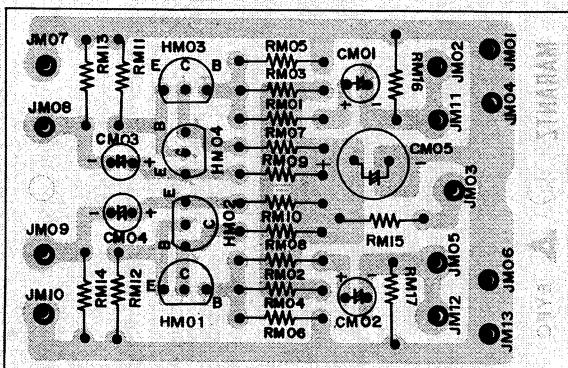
B.T.L. Phase Inverter Assembly PM01 Component Locations
